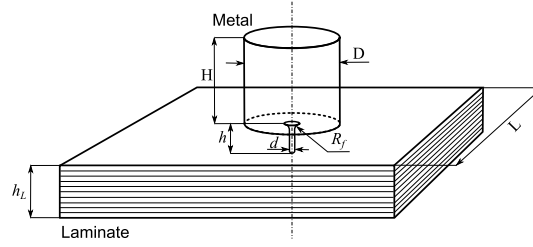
Specimen geometry used for shear tests of metal pins.
